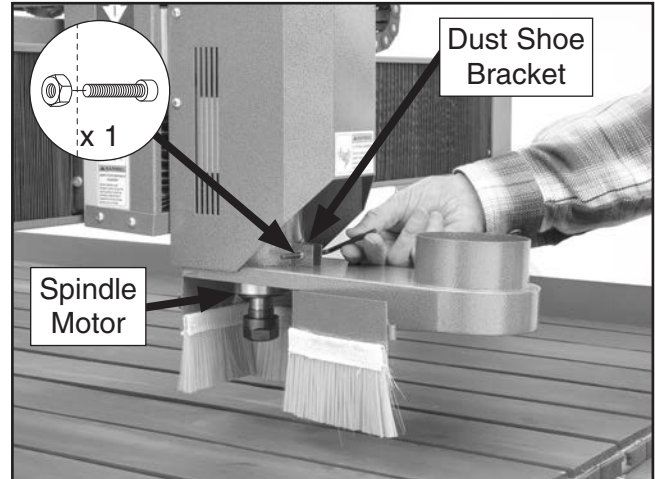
Example of attaching dust shoe bracket (dust shield removed for clarity).
